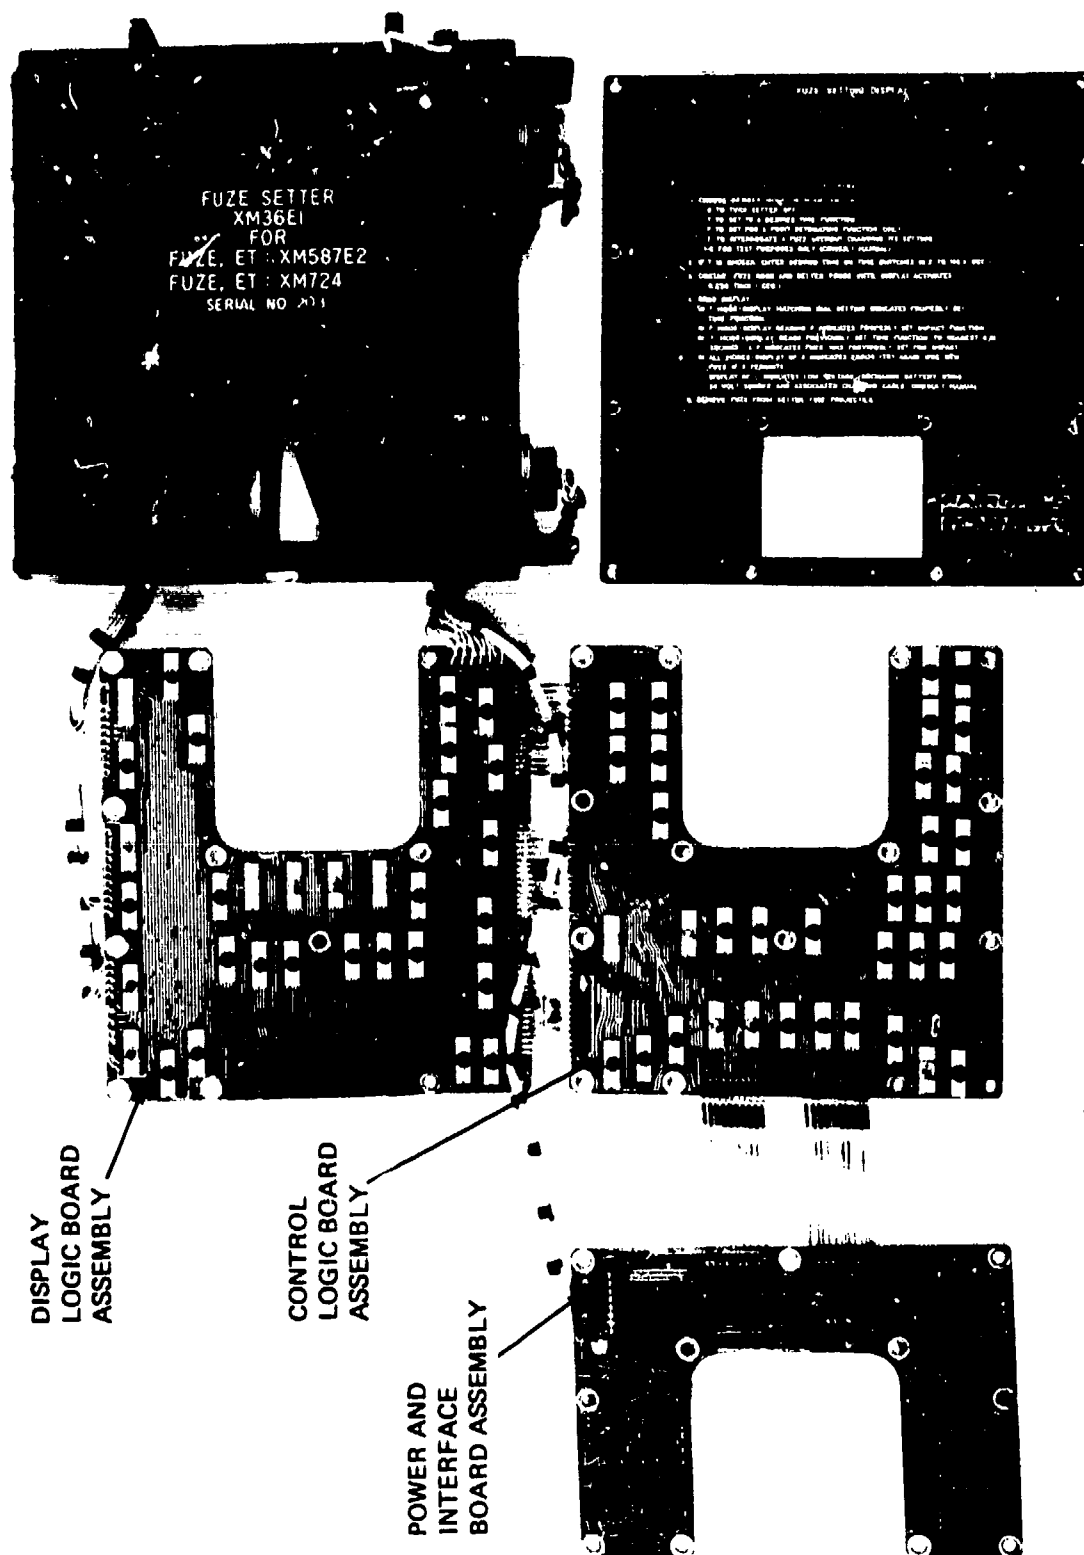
XM36E1 FUZE SETTER WITH PANEL REMOVED - BOTTOM VIEW
